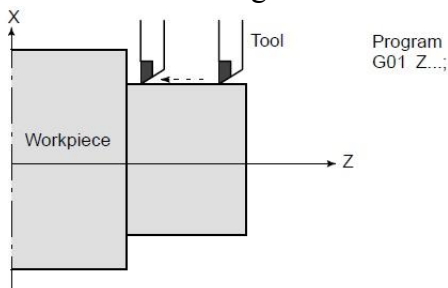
Tool movement along the straight line which is parallel to Z-axis
